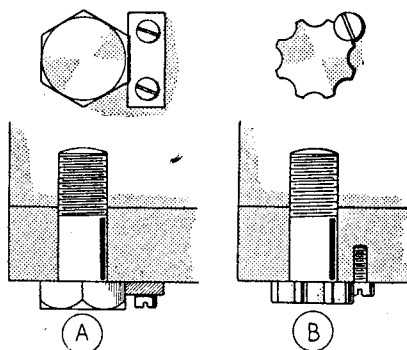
"A"—locking plate for hexagon bolt; "B"—bolt-head locked with set-screw
